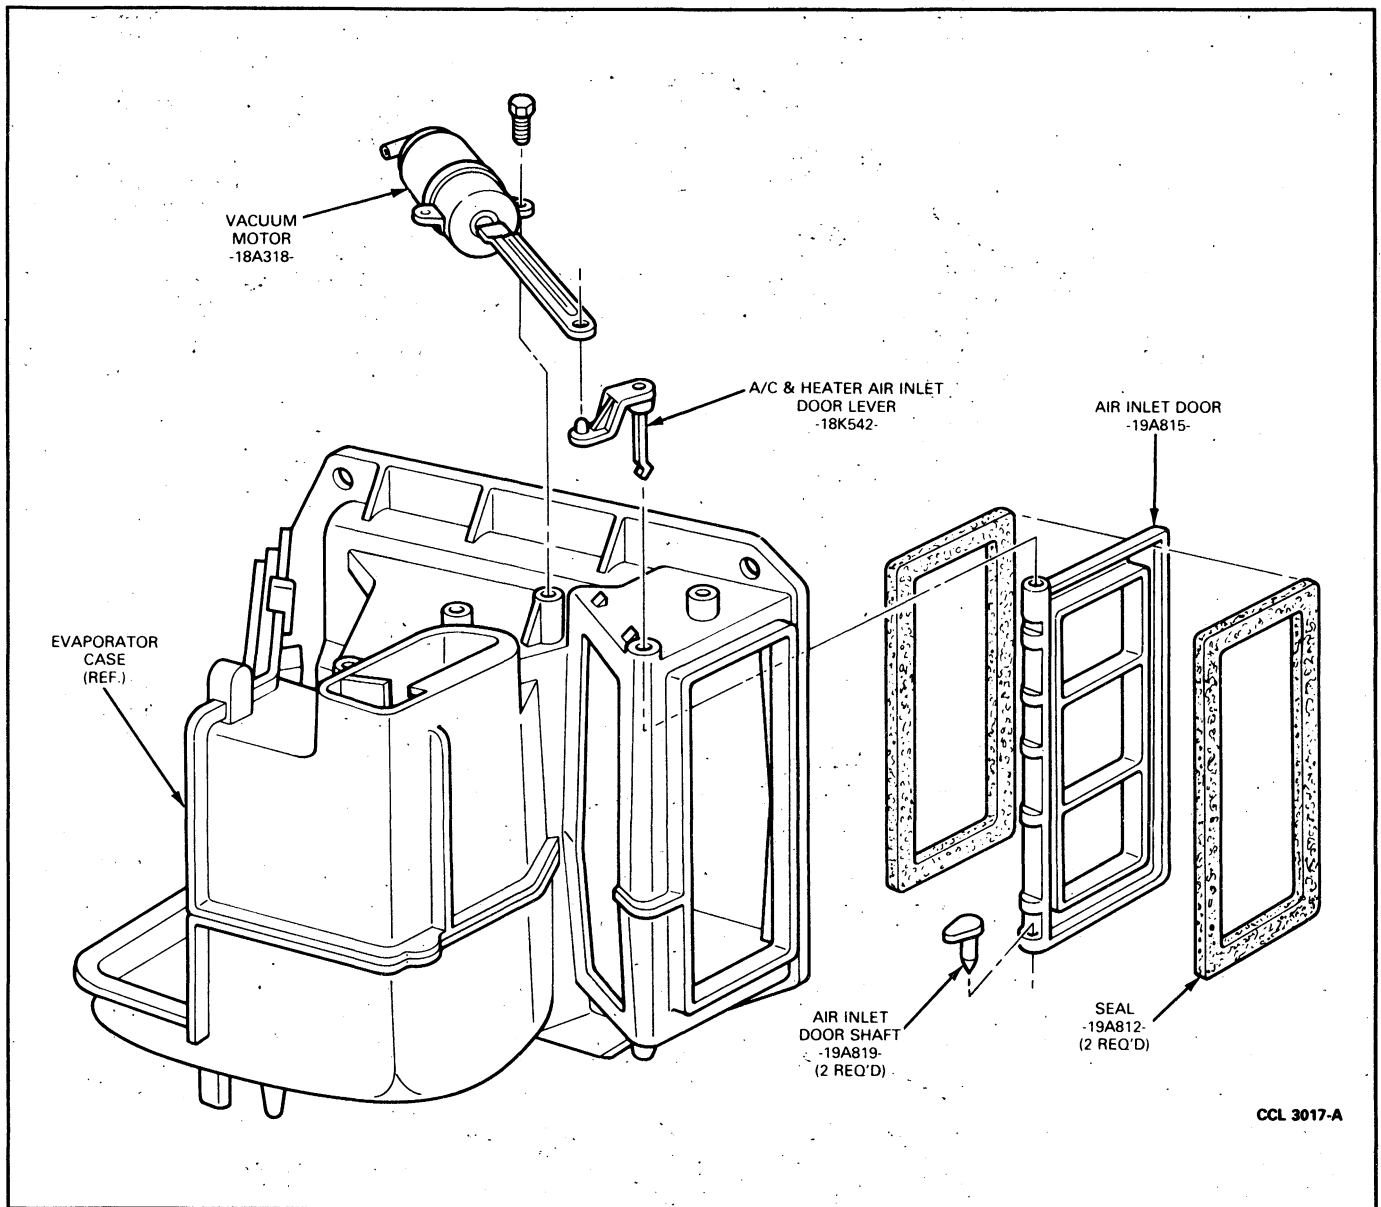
Outside/Recirc Air Door Vacuum Motor
